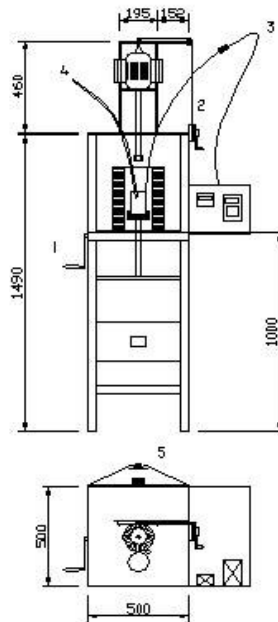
Schematic drawing of the apparatus [mm]: (1) crucible actuator (2) motor/shaft actuator (3) thermocouple (4) argon tube (5) fun
